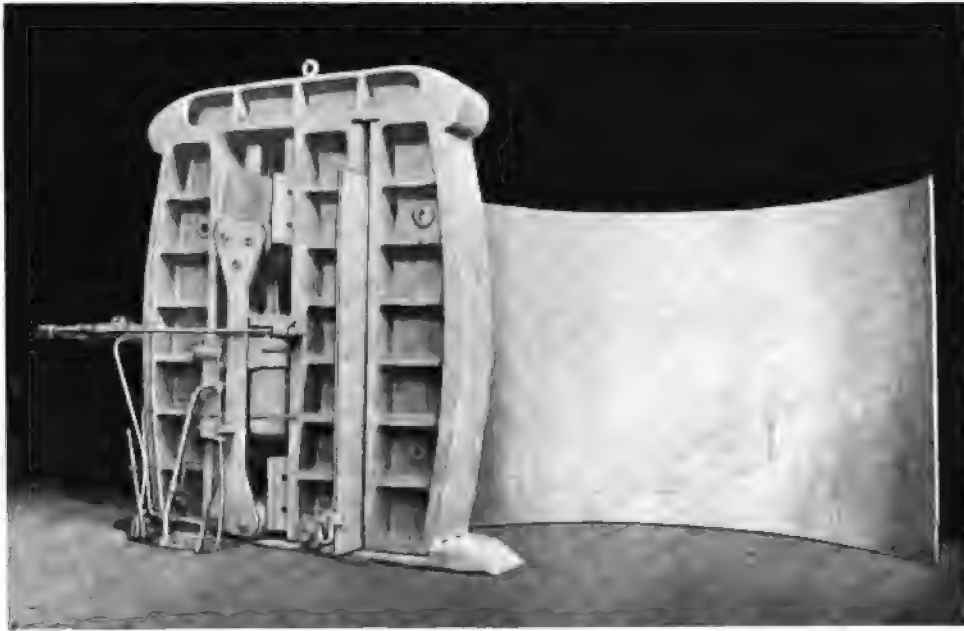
PLATE BENDING PRESS. (Fielding & Platt, Ltd.)
